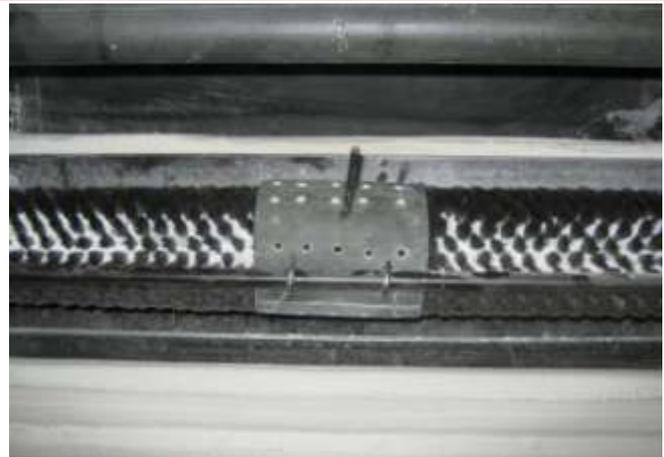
Manually Operated FRP Scrubber Installed On the Machine
